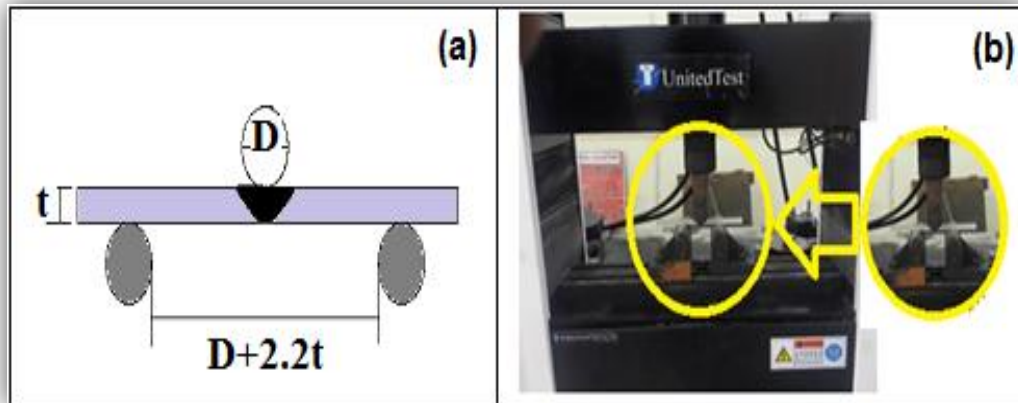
(a) Standard bending test according to ASME (QW-462). (b) Universal testing machine (united test 100KN) with fixture of 3-point bending.
